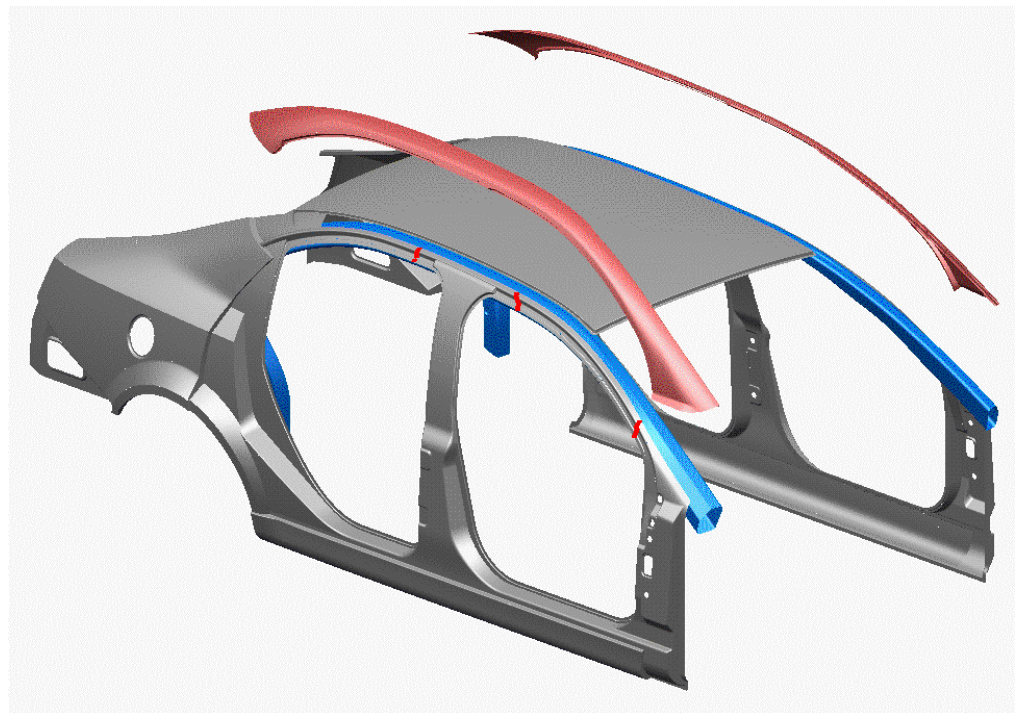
View of PNGV-Class roof side rail appliques exposing the body side outer laser welded joints and roof side rail joints.
